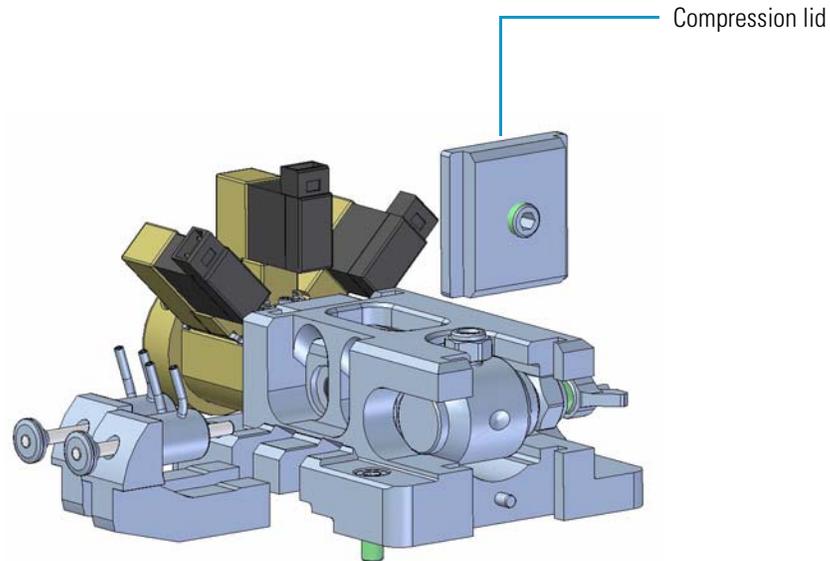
Inserting the displacement chambers, check valves, and outlet module into the LDA
